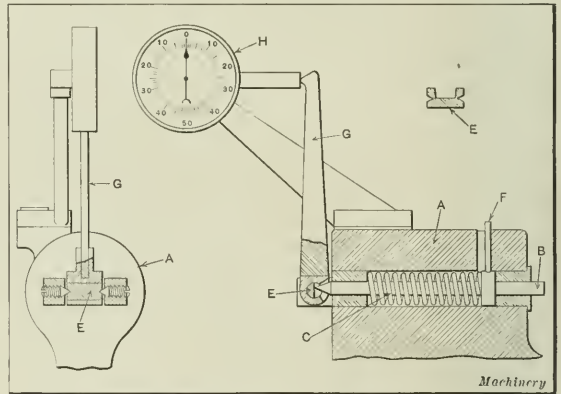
Diagram showing Pressure Arrangement used on Slocomb Measuring Machine shown in Fig. 12
